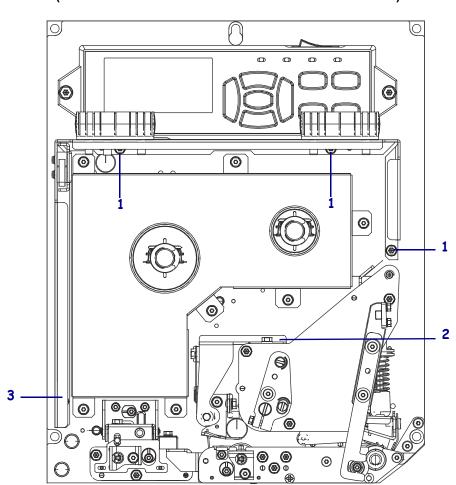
• Media Door Mounting Screws (Shown with Front Section of Media Door Removed)
